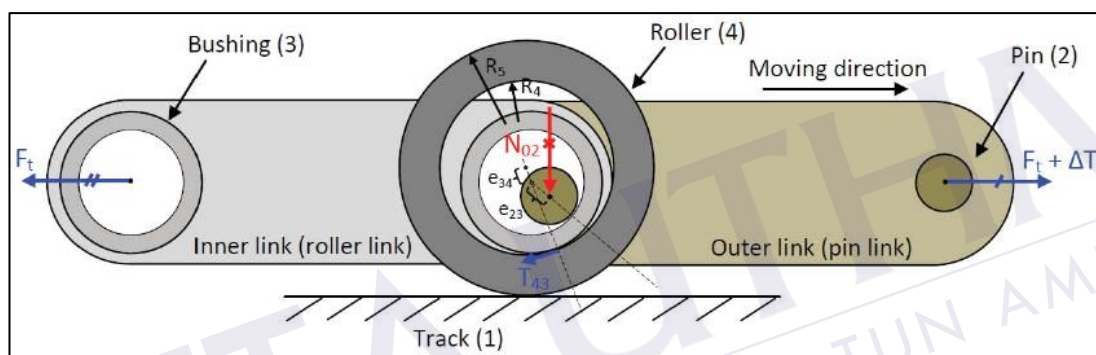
Section view of a roller chain with exaggerated clearances (Kerremans, Rolly, Baets, Pauw, Sukumaran, & Delgado, 2011)
